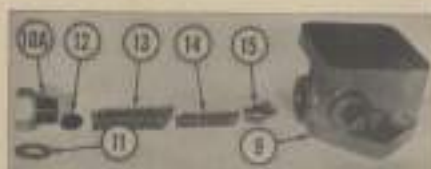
Exploded view of Webster power steering pump relief valve assembly shown at 10—Fig. 16.
